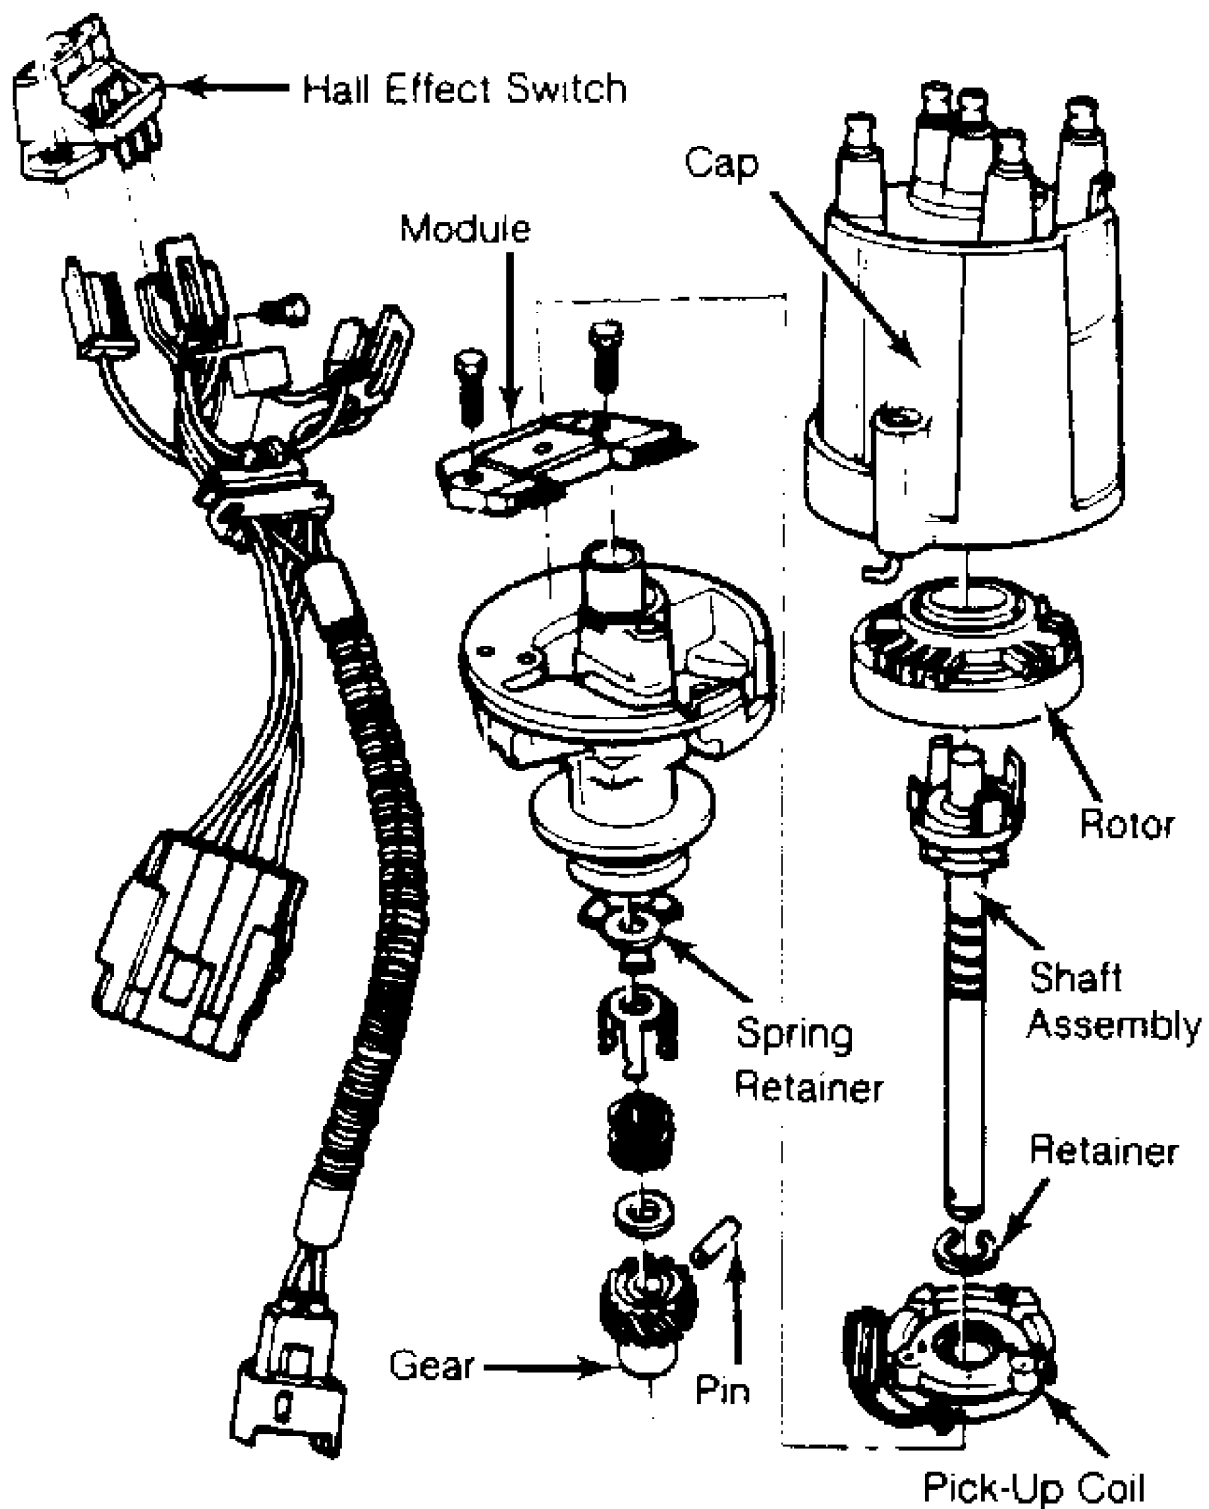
Exploded View of HEI Distributor Without Sealed Connector
